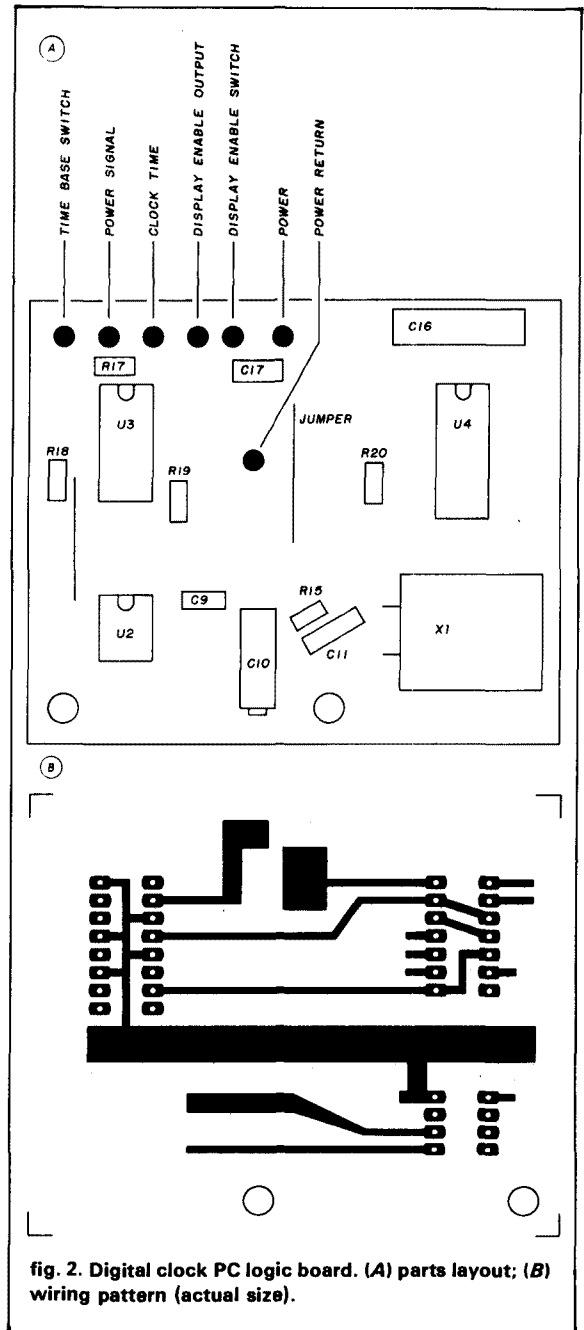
Digital clock PC logic board. (A) parts layout; (B) wiring pattern (actual size).
